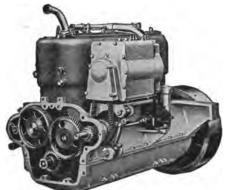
Entz single unit starting and lighting system; view showing mounting of motor generator on engine and silent chain drive.
